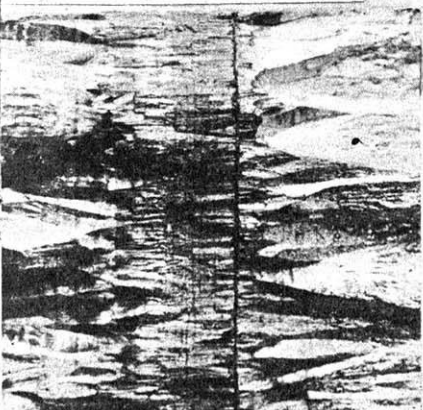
Fractured Surface Magnified about 4 diameters showing starting sheet.
